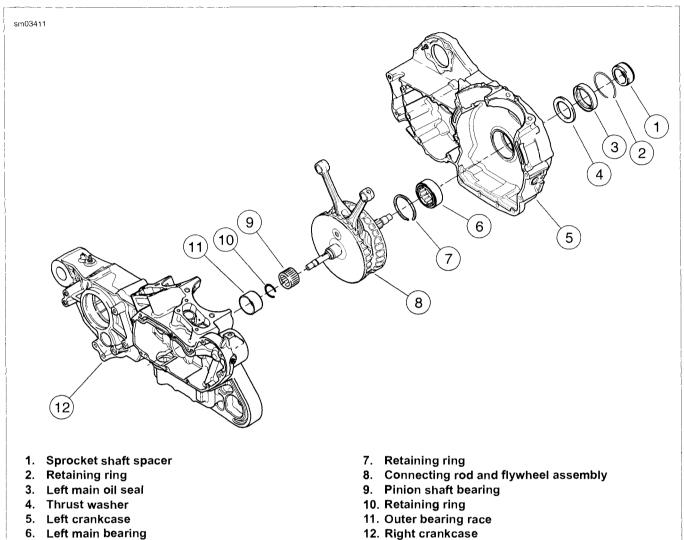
Crankcase and Flywheel Assembly (typical)
